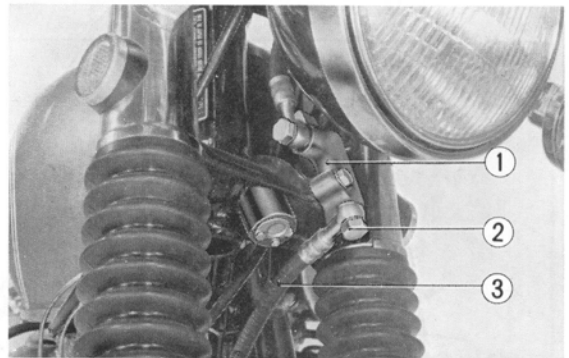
① Oil joint ② Oil joint bolt ③ Brake hose
